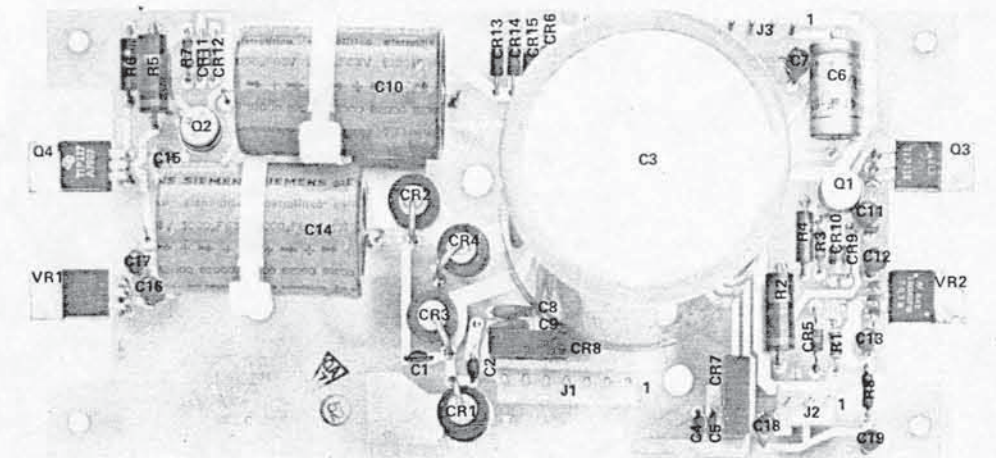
Power Supply (A4) PCB Parts Locator Diagram
